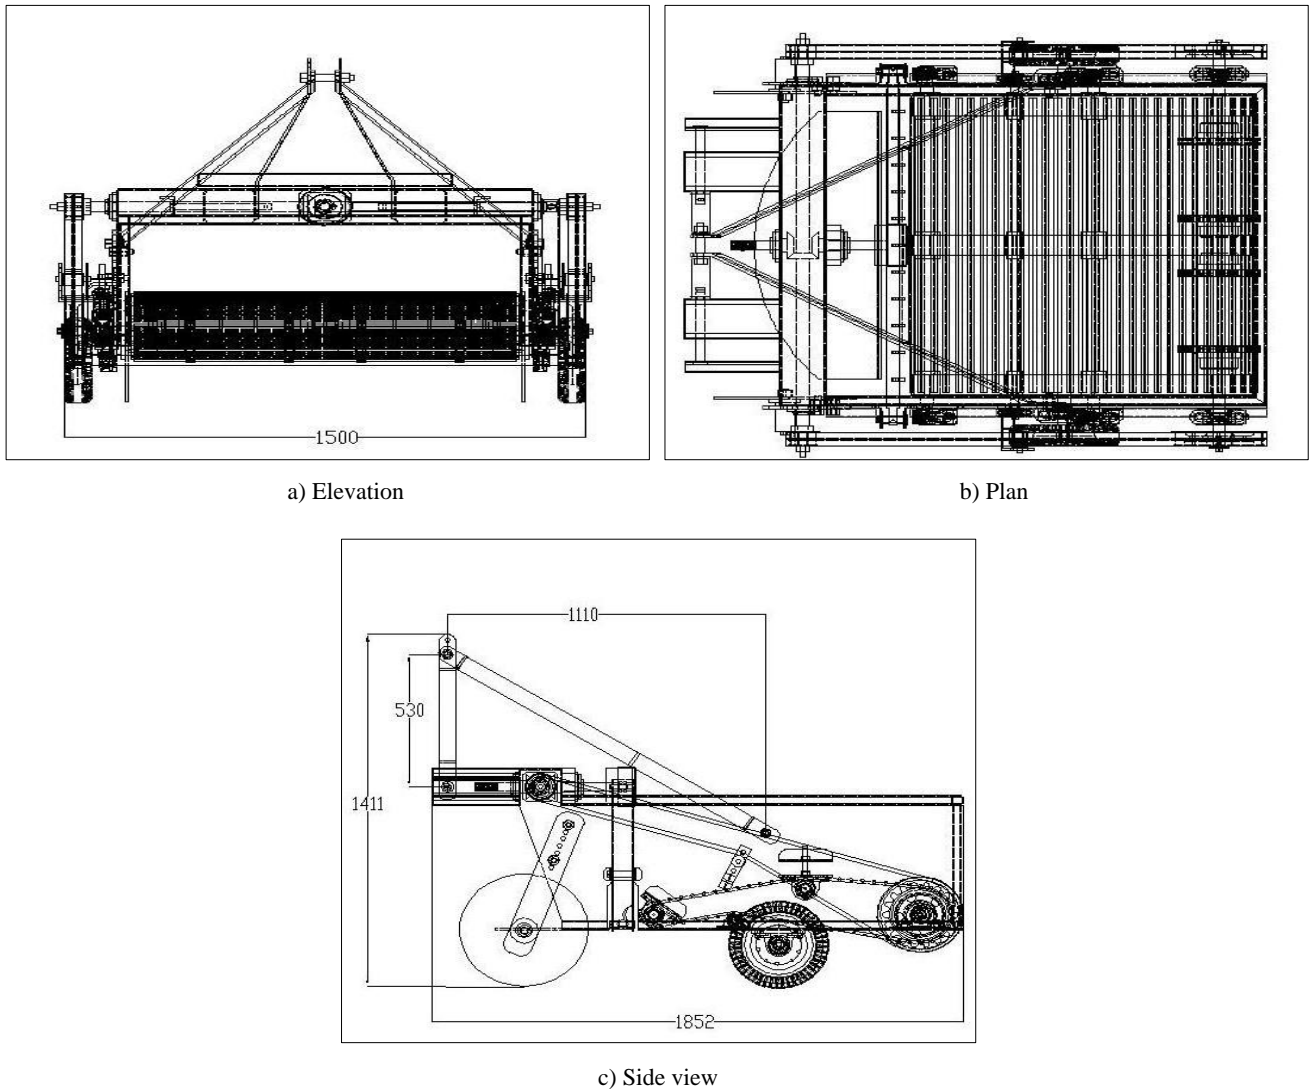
Orthographic multi-view drawings of ginger harvester cum- elevator
